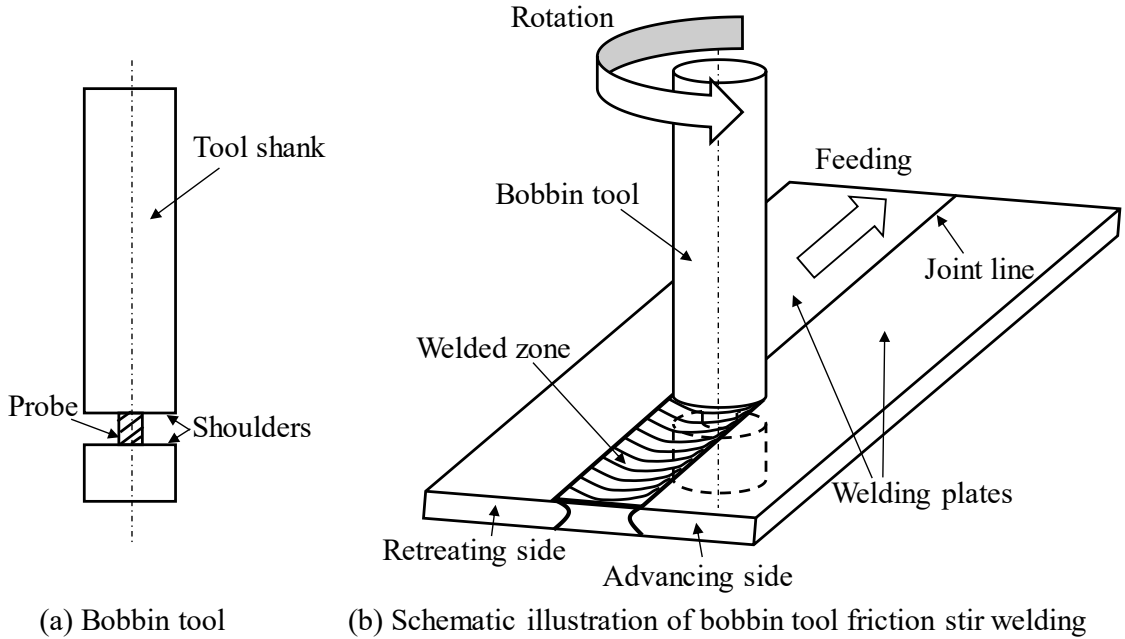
Bobbin tool and schematic illustration of bobbin tool friction stir welding.
